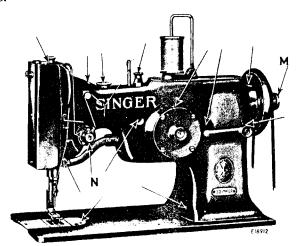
Front View of Machine, Showing Oiling Points also Adjustments on the Machine
